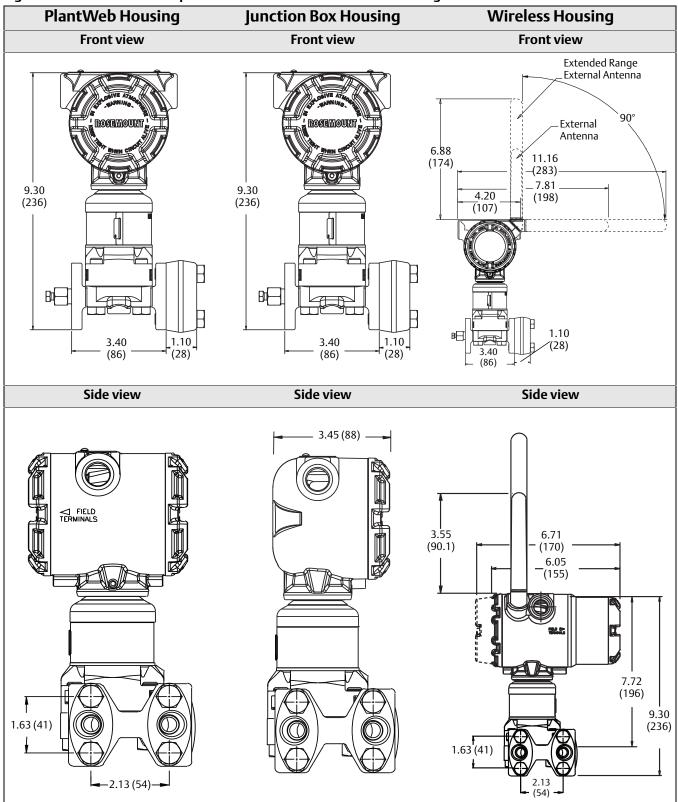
Transmitter with Coplanar Sensor Module and Traditional Flange
